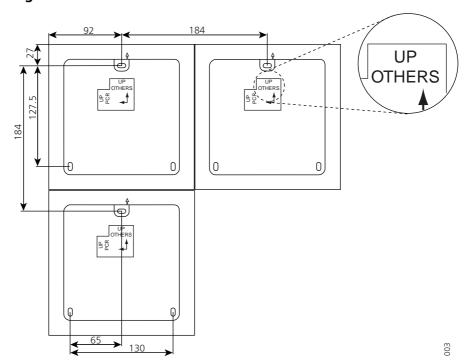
Mounting dimensions in mm. The modules should be mounted with the marking text, "UP OTHERS", upwards.
